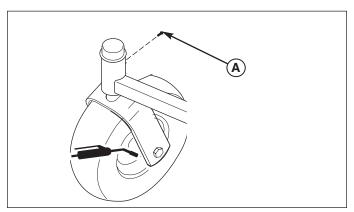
Front Caster & Wheel A. 1/4-28 Bolt
